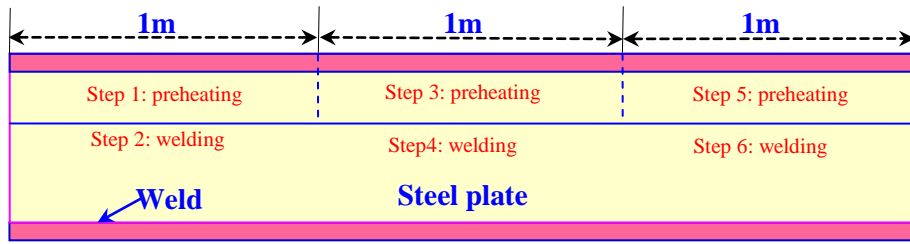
Welding sequence of the HSS box section T-joint.
